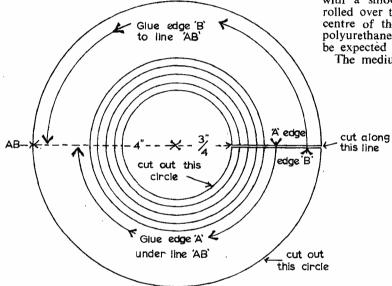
Diagram showing how a sheet of card should be cut and glued to form a small h.f. radiator for the centre of the large cone.
